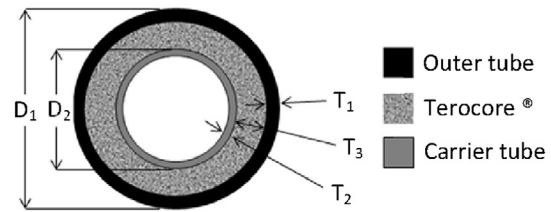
Cross sectional view and dimensions of a typical Aluminium/Terocore® hybrid structure.
